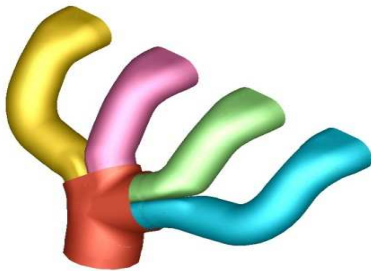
The tube hydroformed product configuration of exhaust manifold
